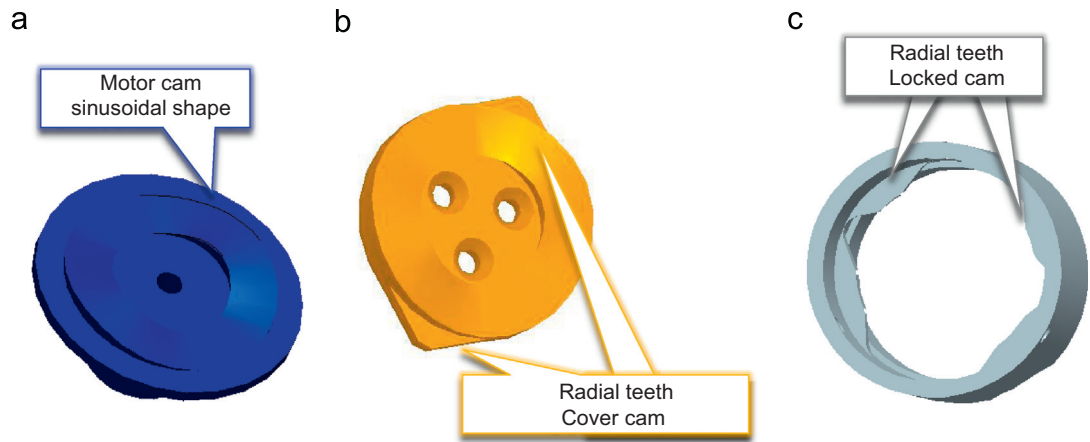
Mechanism cams 3D models (a) Motor cam (b) Cover cam (c) Locked cam.
